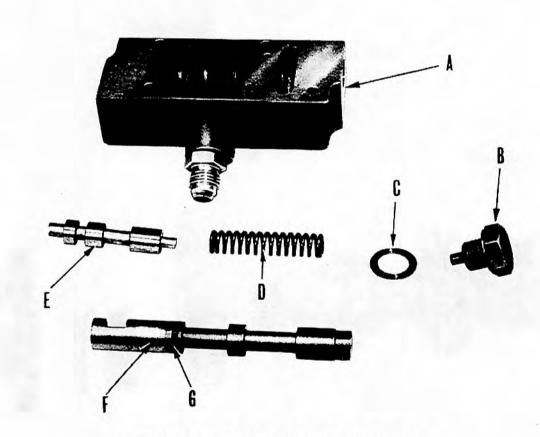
EXPLODED VIEW OF CONTROL VALVE
